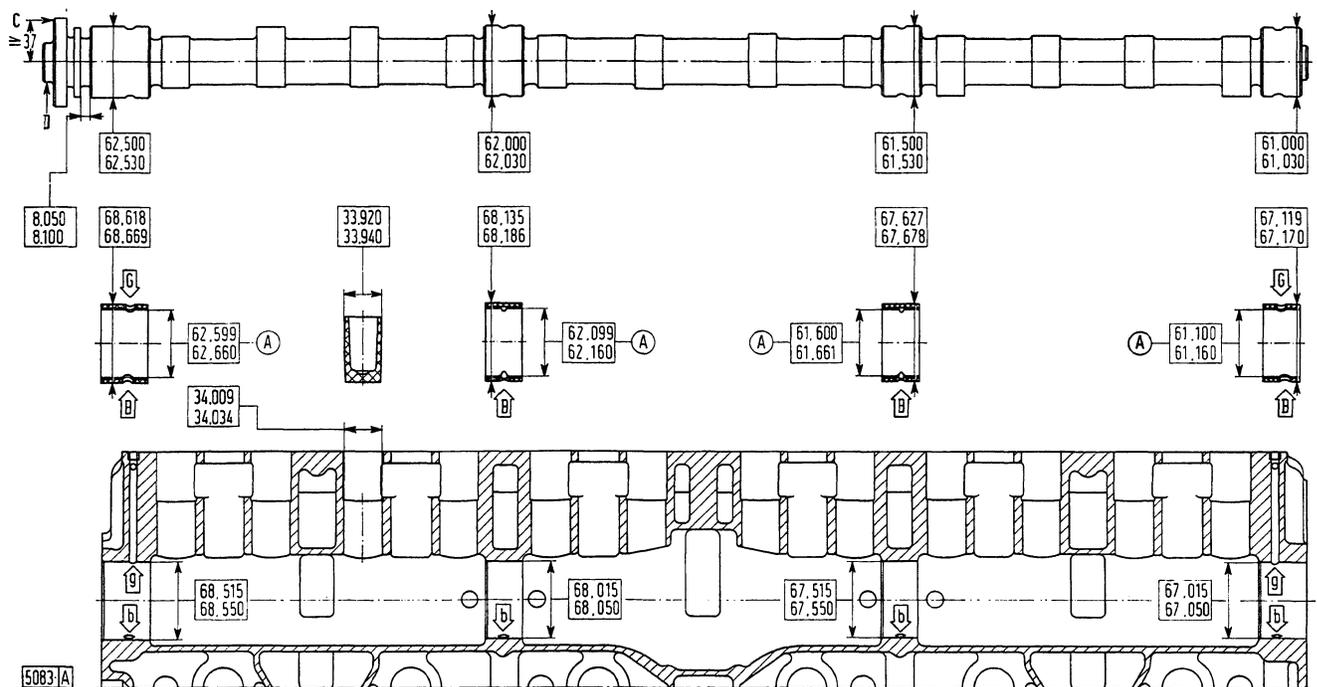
Camshaft, Bush, Tappet and Housing Details
